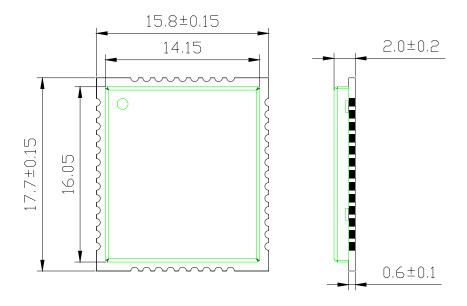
BC66 Top and Side Dimensions (Unit: mm)
